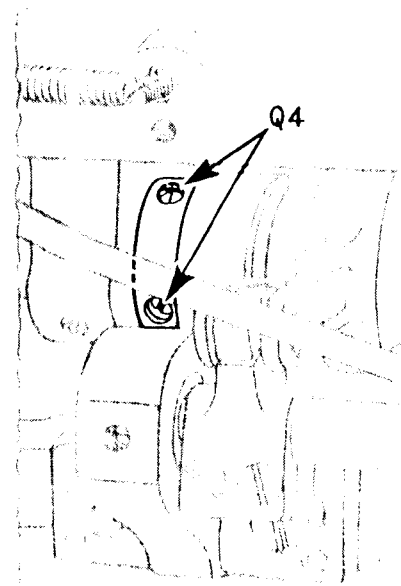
Automatic Thread Nipper Eccentric at Back of Machine
